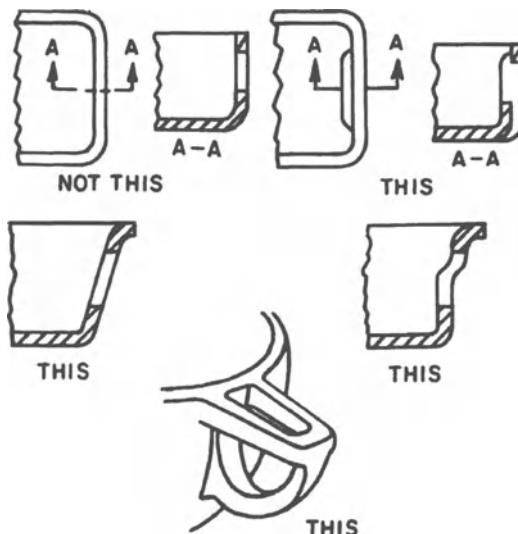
Methods for molding holes or openings in side walls without undercutting mold movement.
